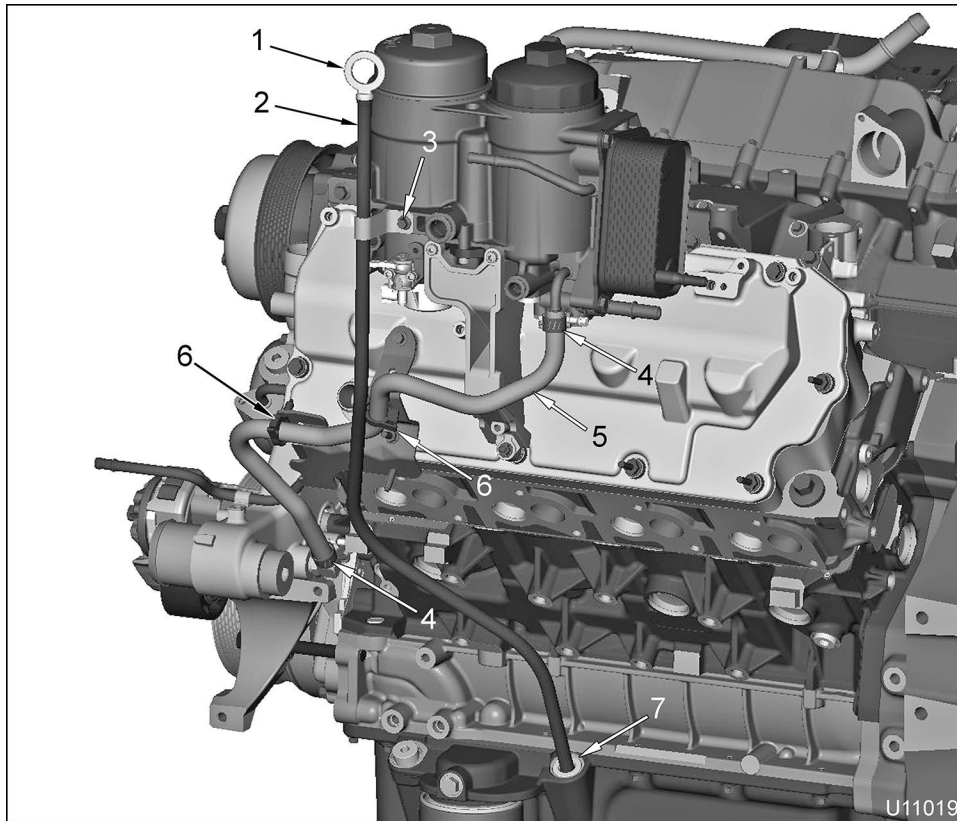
Fuel Filter Purge Line Connection to the Clean Outlet
